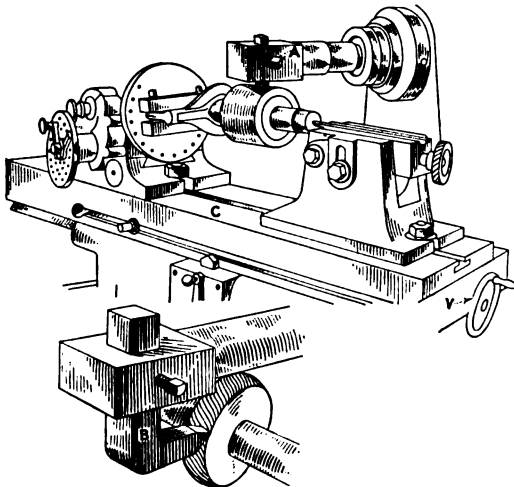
A SIMPLE ARRANGEMENT FOR MAKING A SPIRAL KNURL ON THE MILLER
